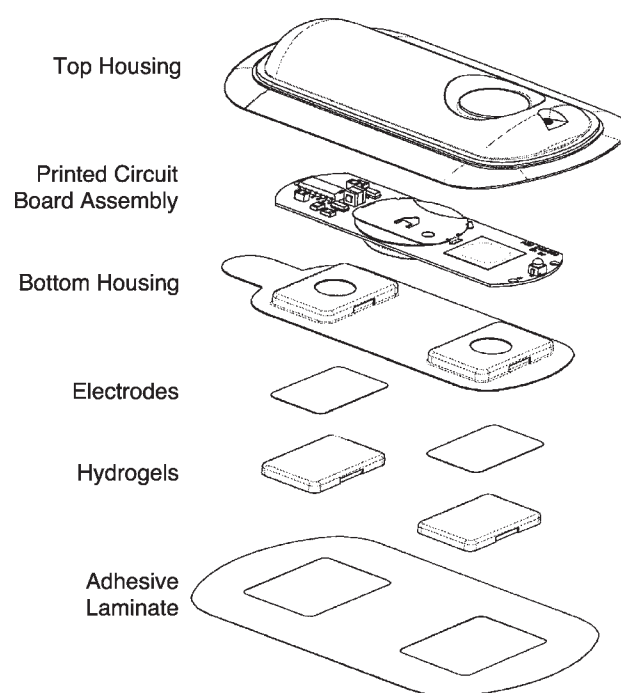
Exploded view of an E-TRANS[®] system showing major components: top housing, printed circuit board assembly, a bottom housing containing reservoirs for placement of electrodes and hydrogels, and an adhesive laminate (diagram from International Patent Publication Number WO 96/39222).
